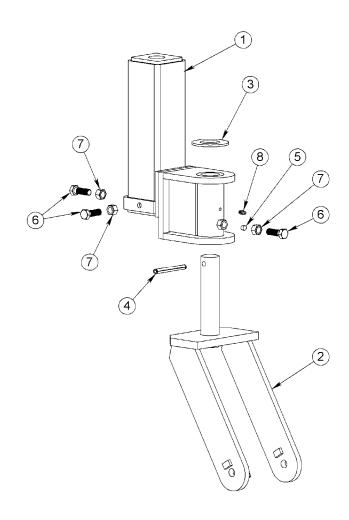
Exploded View: Outer Tube & Yoke Assembly
